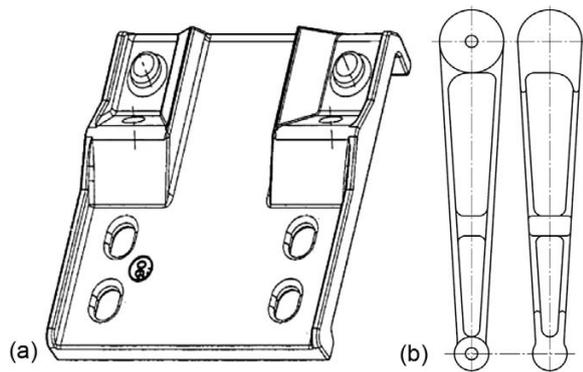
a) Shape of the flat-plate forging and b) shape of the piston-rod forging
